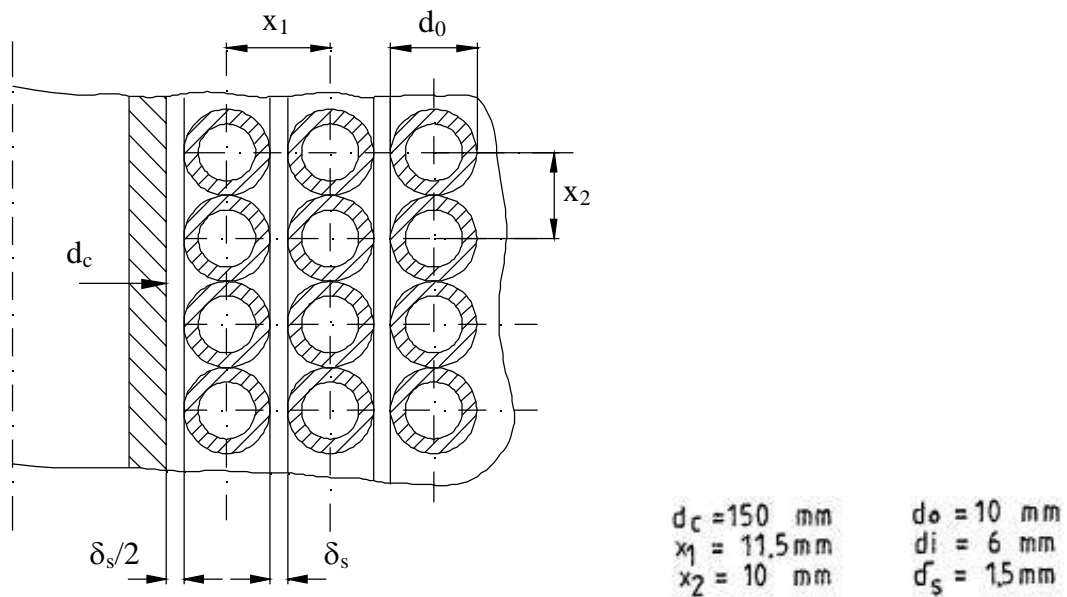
Coiled tubular heat exchanger with smooth outside surface.
